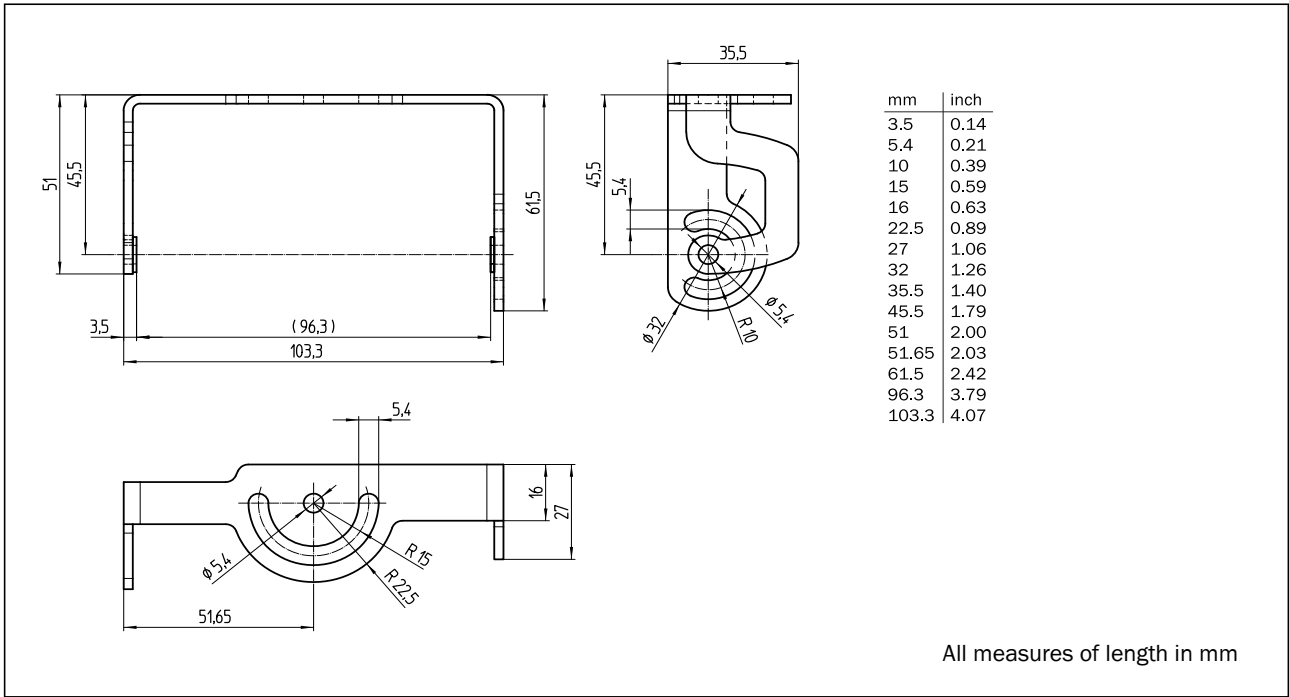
Dimensions of the mounting bracket part no. 2050705
